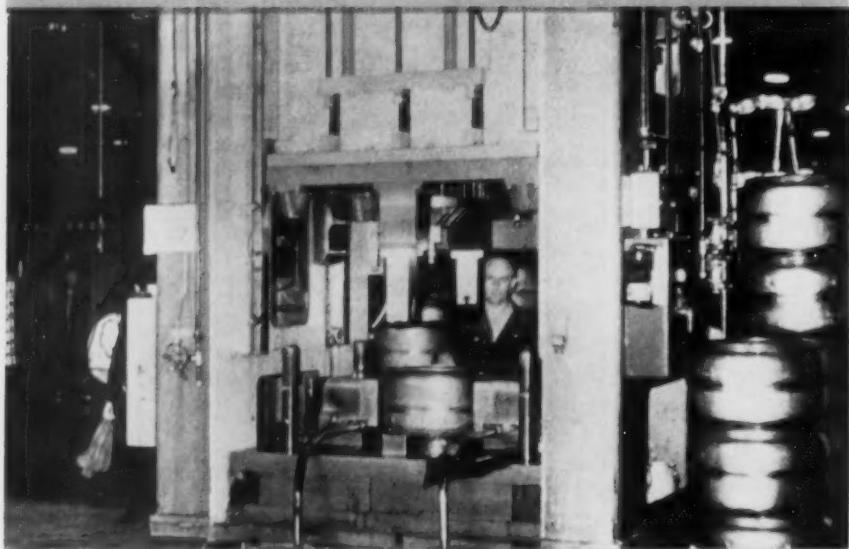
This illustration shows a view of a piercing die operation in which the rear guides of the press are left unguarded, thereby creating a readily obvious operating hazard.
